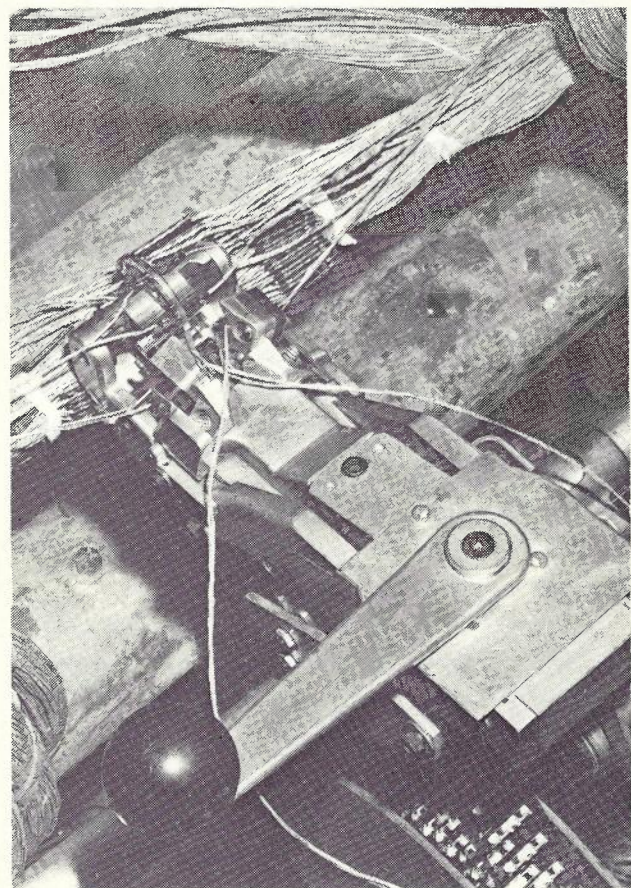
Manual Jointing Machine Type MA8A (A-MP).
